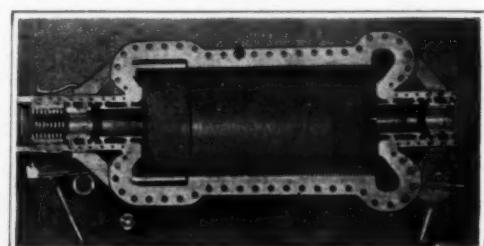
Upper half of the turbine case ready to be bolted in place for boring the blades.
